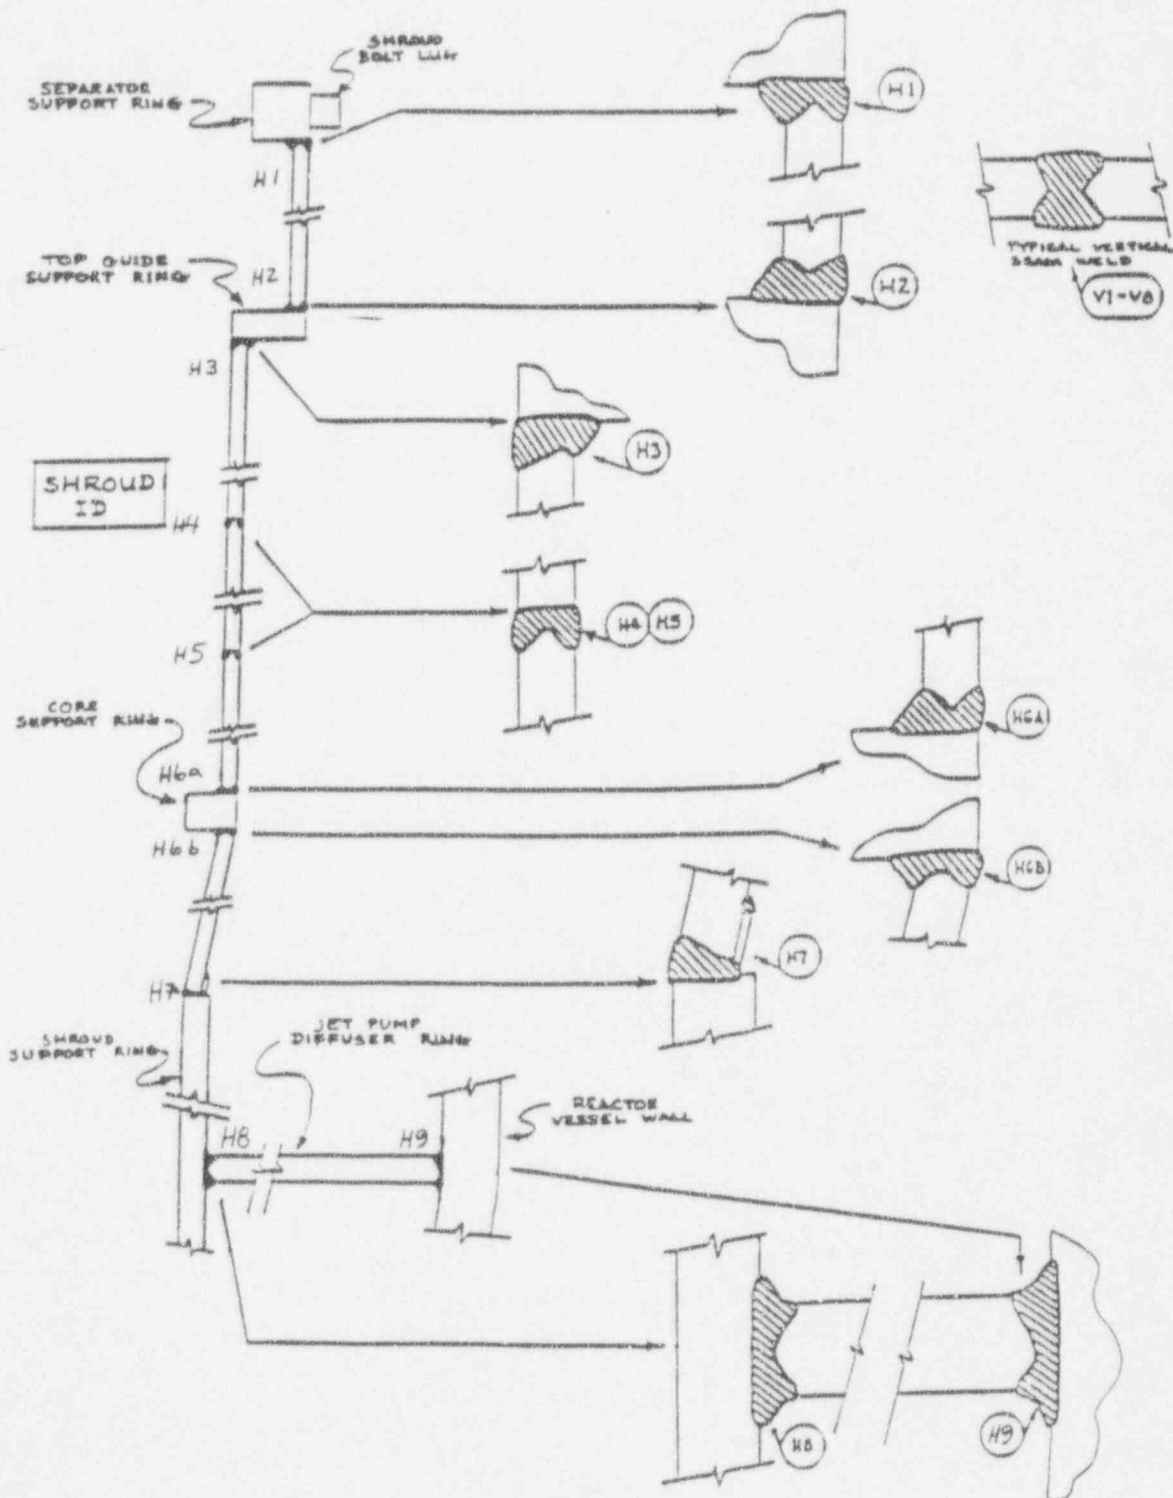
Shroud Cross-Section Showing Welds
